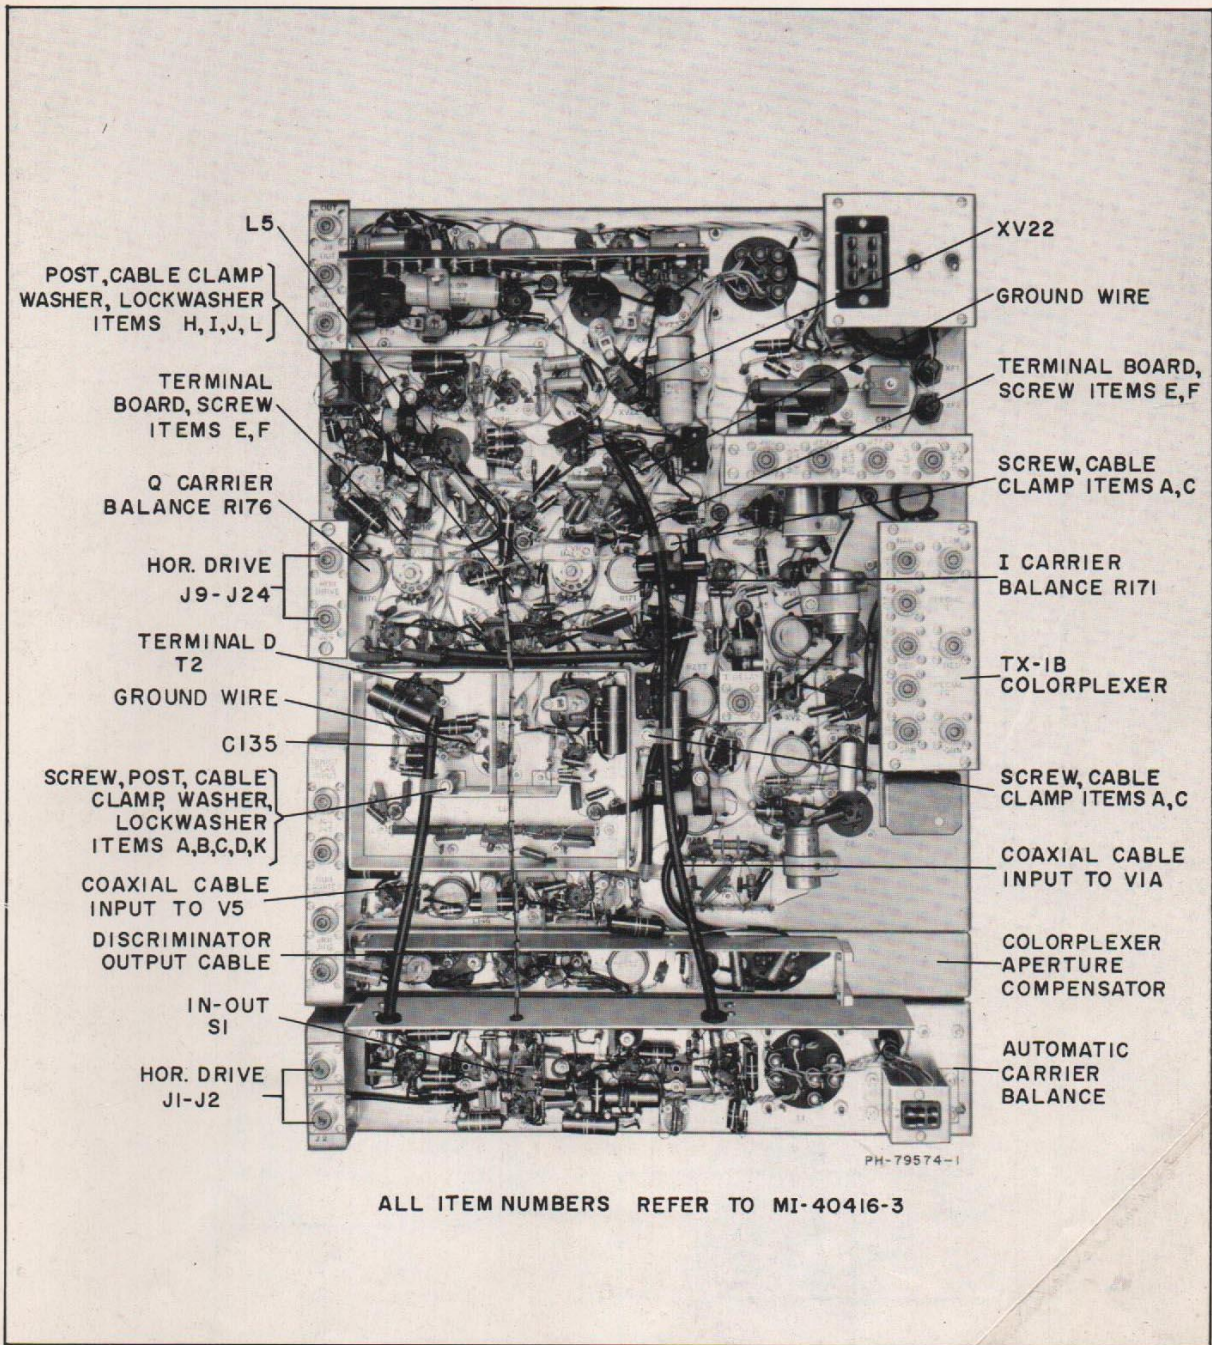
Rear View showing connections to TX-1B Colorplexer
